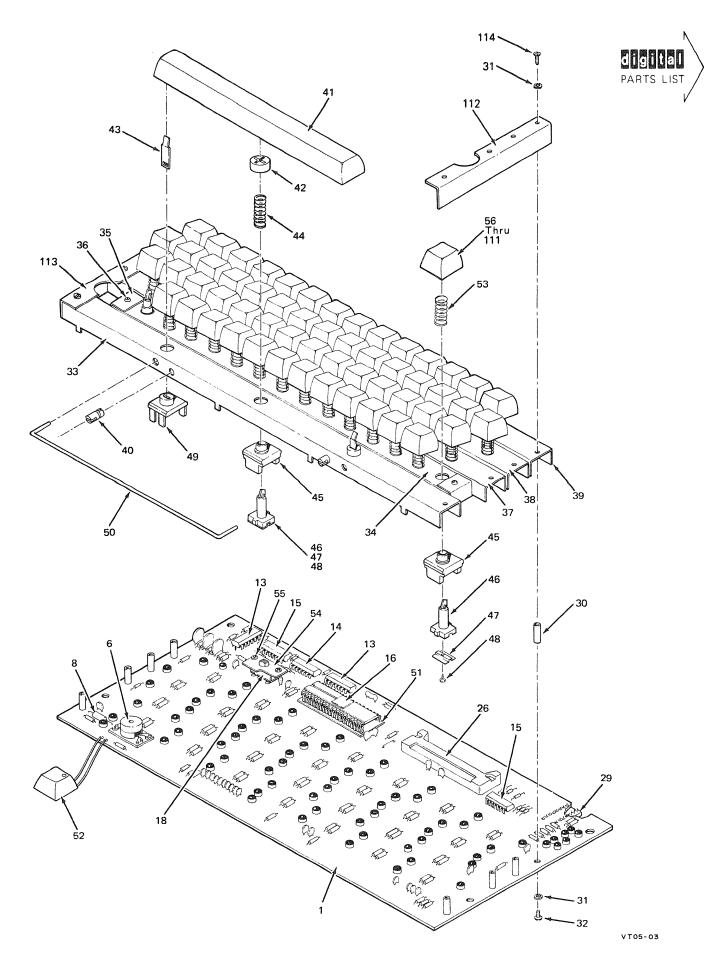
LK01 Keyboard Assembly (Sheet 1 of 2)
